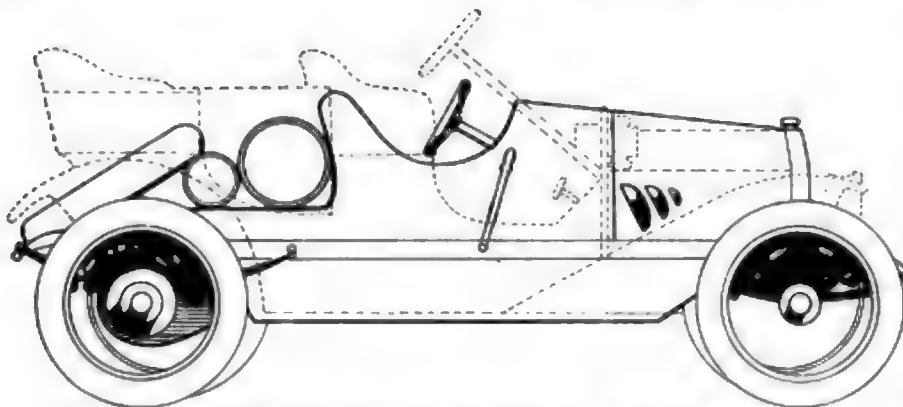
Suggested body design for use on old Carter car. The seat cannot be real low because of the necessary clearance over the friction disks
